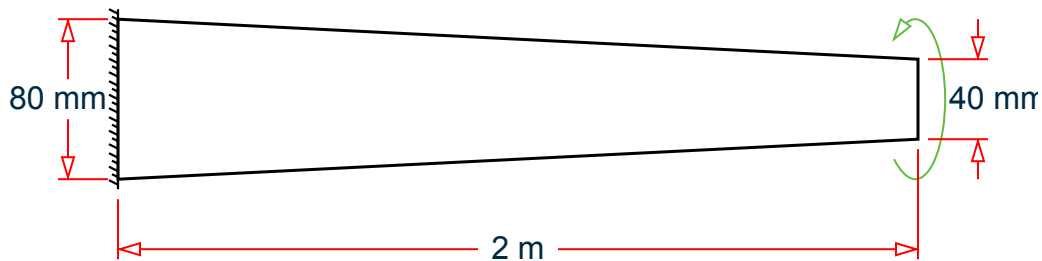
Cantilevered member with a tapered, hollow shaft cross section
